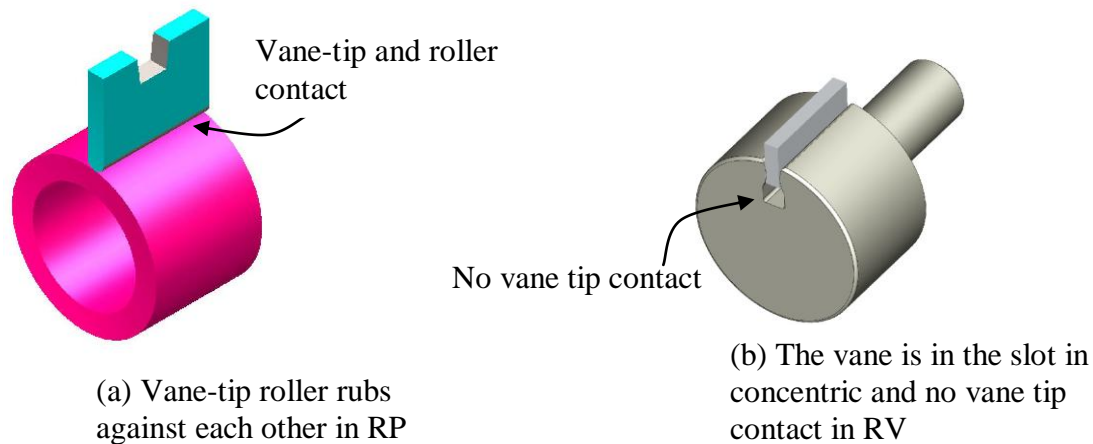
Roller, Eccentric and shaft in the RP become a concentric-shaft in the RV
